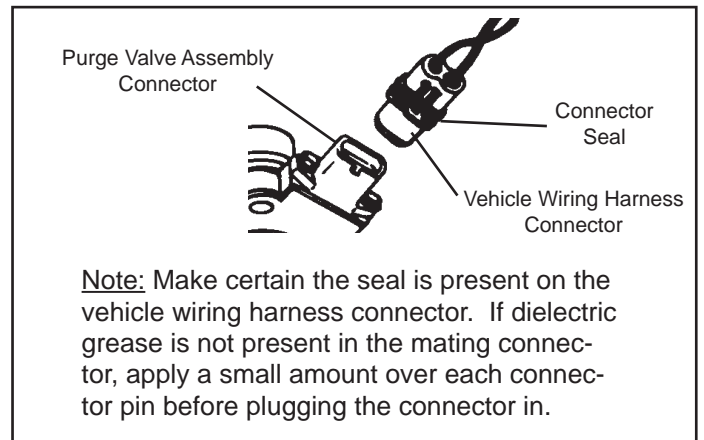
Purge Valve Assembly & Wiring Harness Connectors
